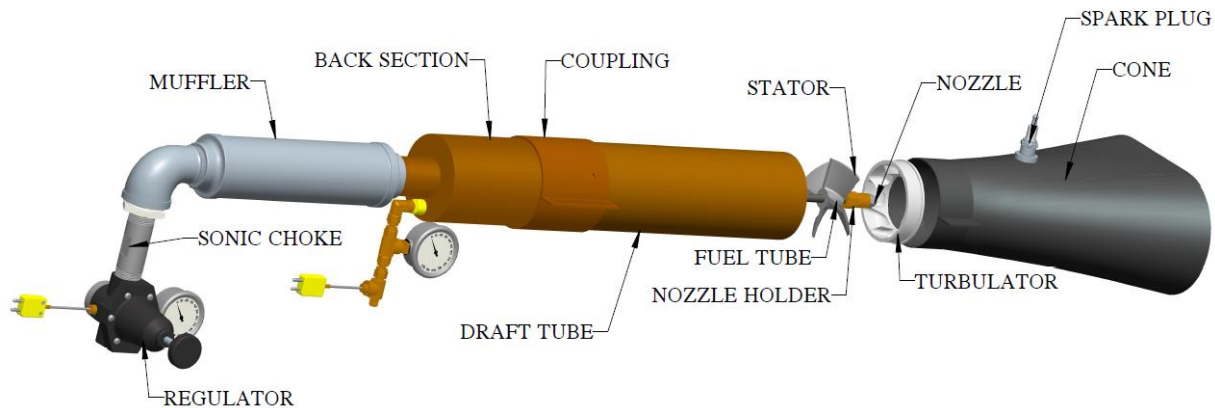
Schematic of the NexGen Burner - Exploded View
